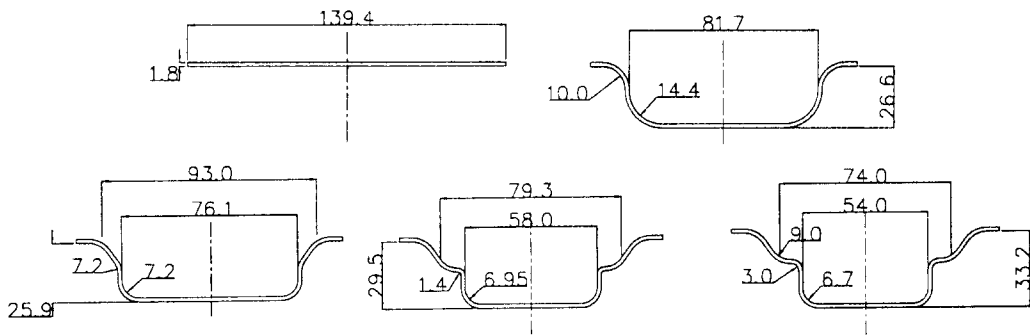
Sequence drawing for the deep drawing parts of the "Clutch Housing"-Output of "Pro-Deep"
